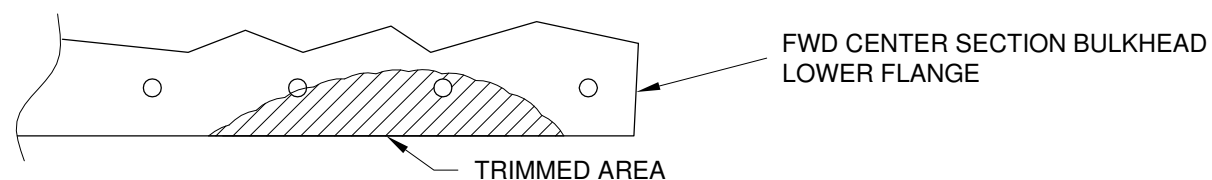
TRIMMING THE FWD CENTER SECTION BULKHEAD LOWER FLANGE
